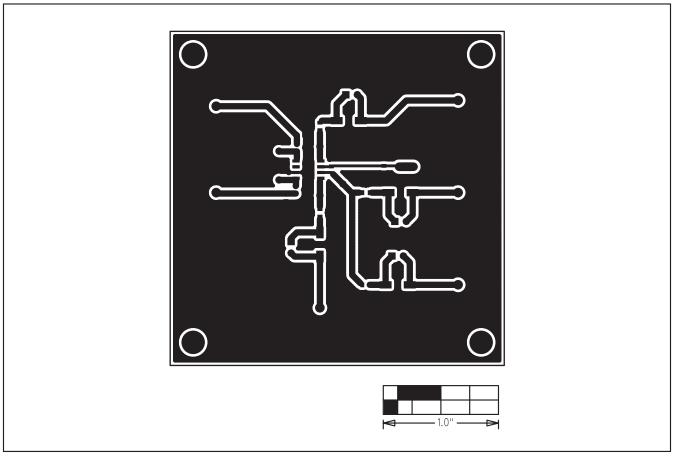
MAX7453 EV Kit PCB Layout—Component Side
